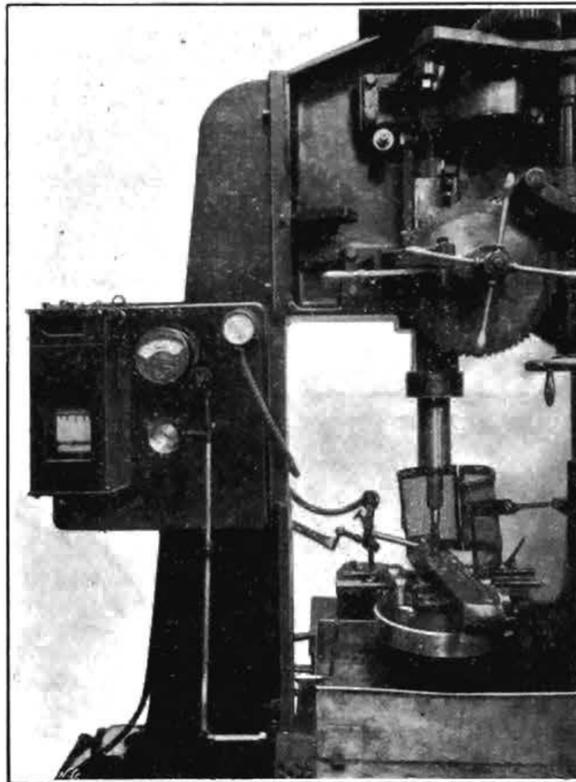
TESTING MACHINE FOR LARGE DRILLS
